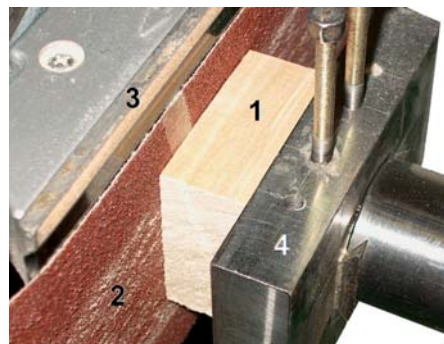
Test stand; 1 - Wooden specimen, 2 - Sanding tool, 3 - Sanding foot, 4 - Wood specimen holder
